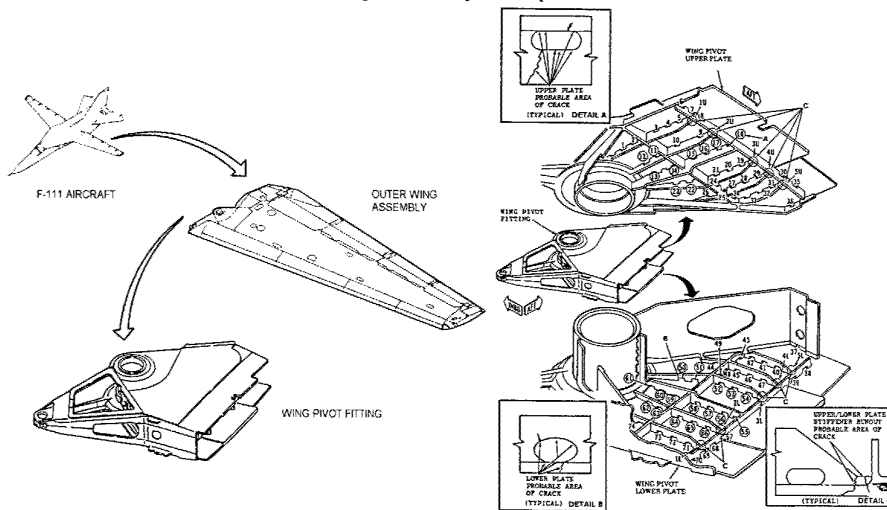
F-111 Wing Pivot Fitting Fuel Flow Vent Hole Details
